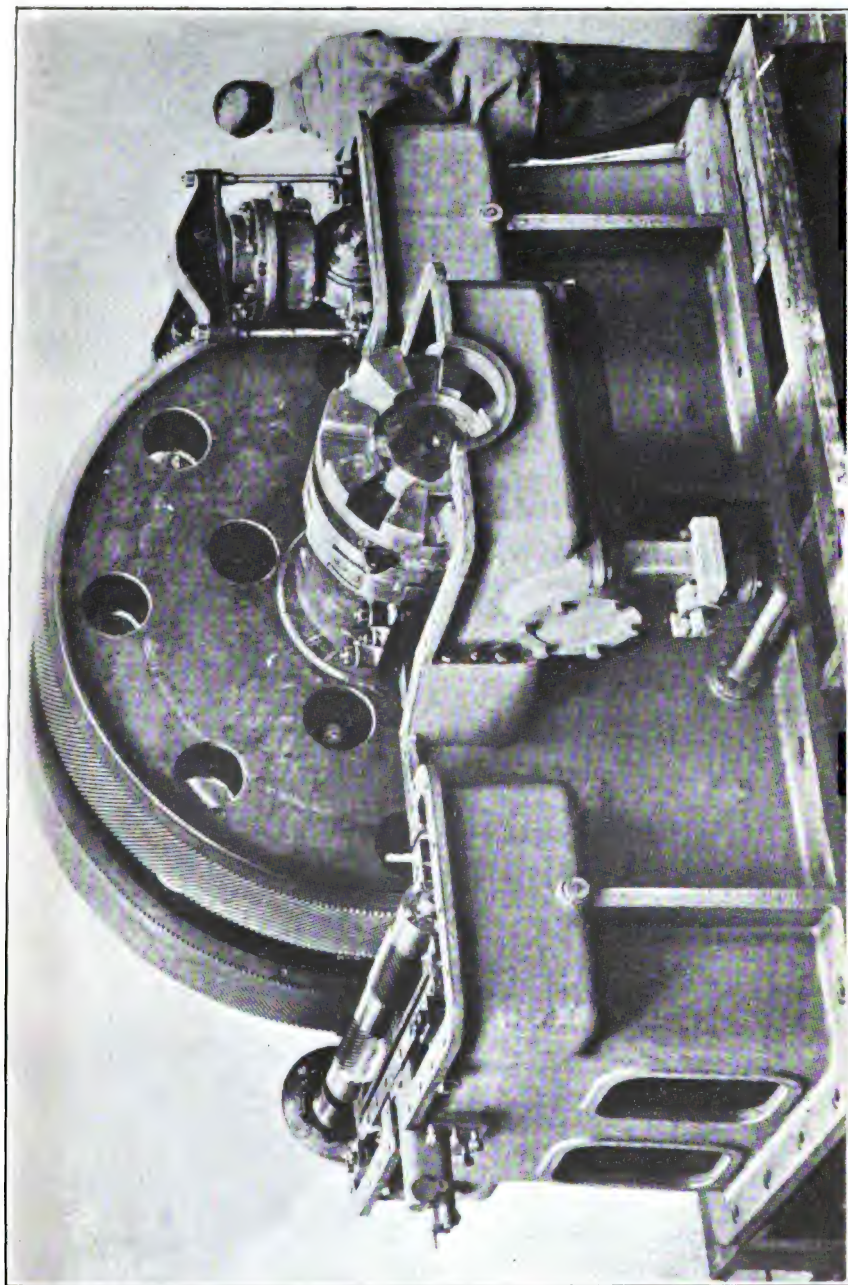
WESTINGHOUSE REDUCTION GEAR FOR CRUISING TURBINES OF BATTLESHIP "PENNSYLVANIA." SPEED REDUCTION, 1,800 TO 120; HORSEPOWER TRANSMITTED, 1,600; WEIGHT, 23,000 POUNDS.
